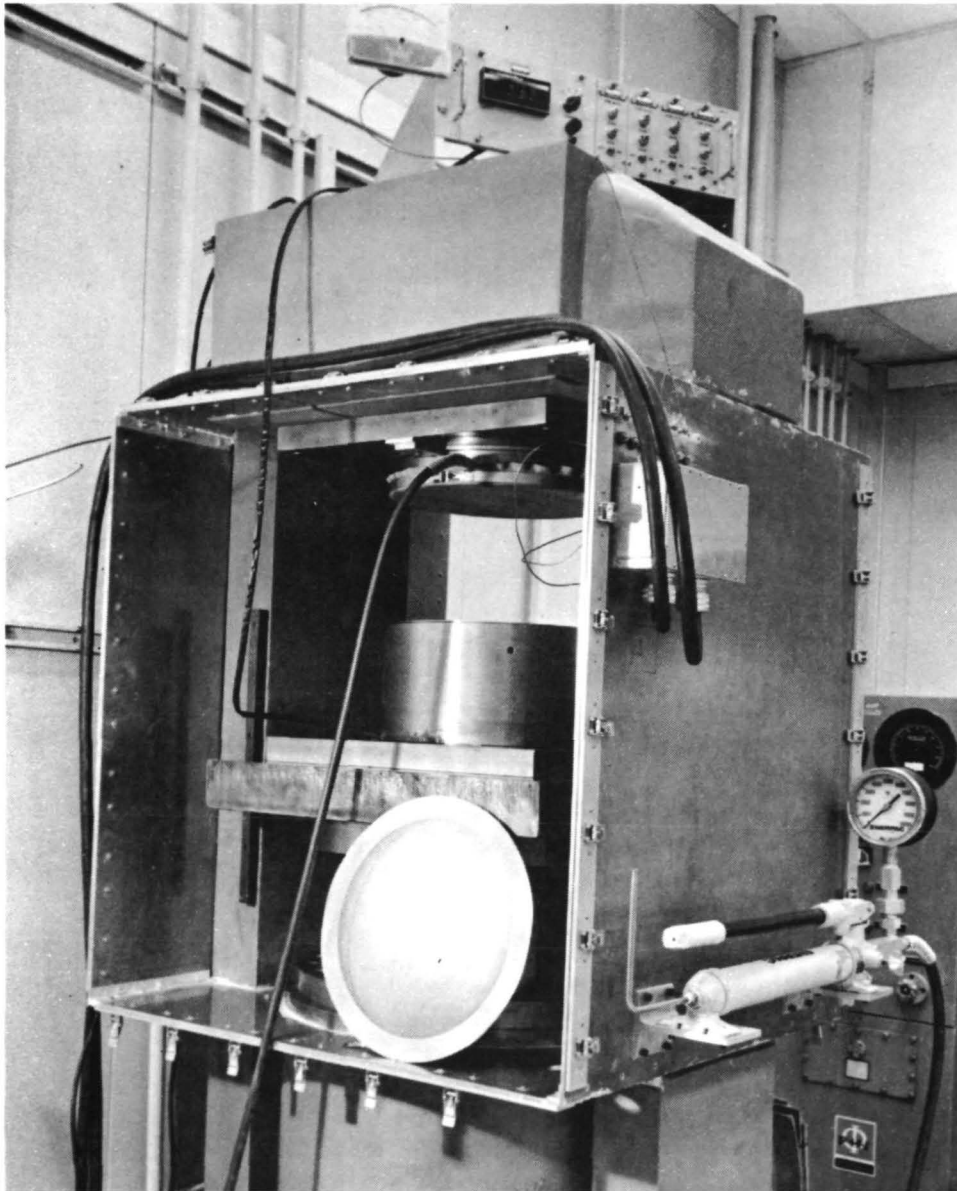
30 cm dish-shaped grid hydroforming press and fixture.
